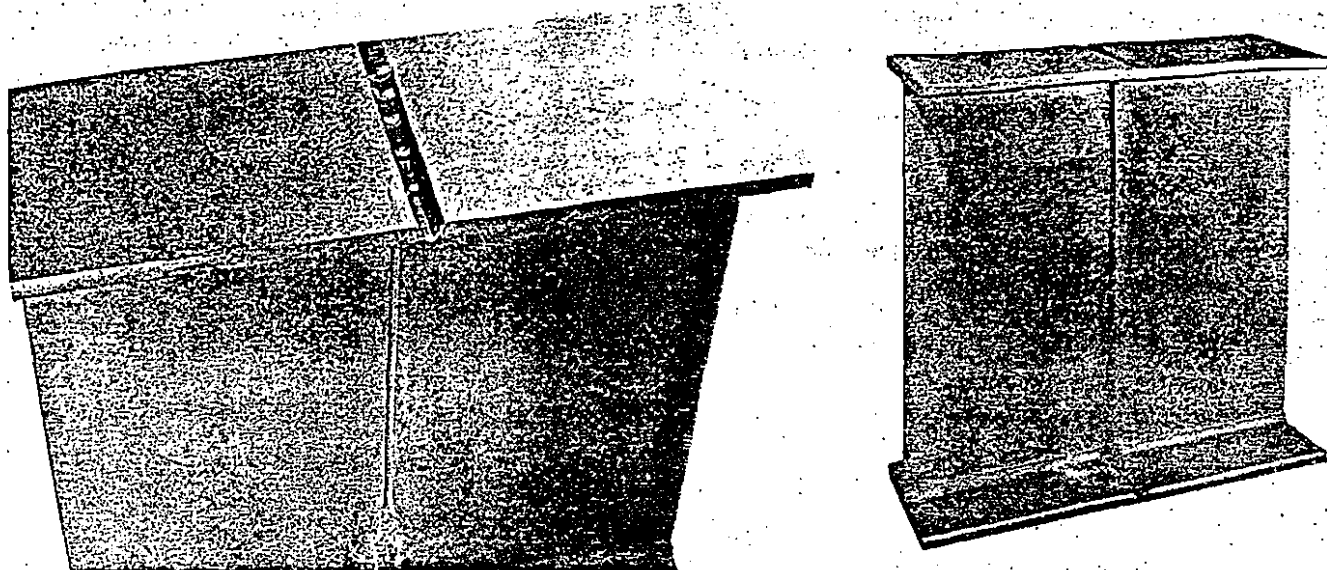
Mock-up welds, such as shown here, provide a first-hand check of welding procedures before they reach the production floor. They can later be used as workmanship samples.
